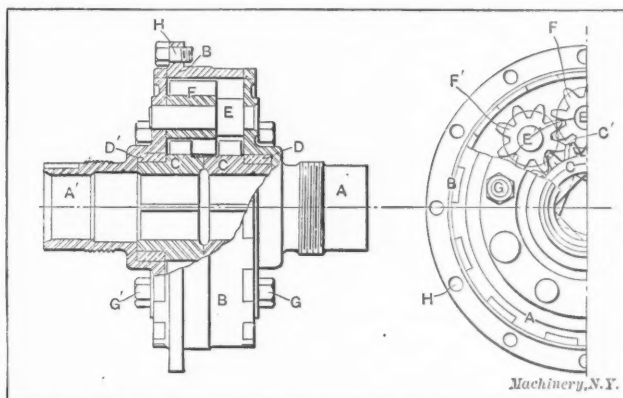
Details of Construction of the 7-inch Equalizing Gear
